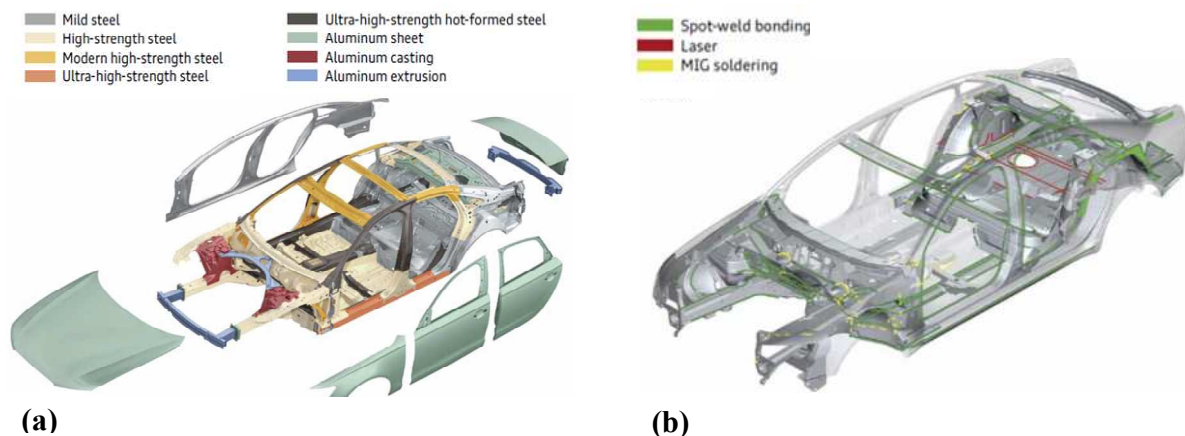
A typical car contains (a) multi-materials and (b) diversified joining techniques.
